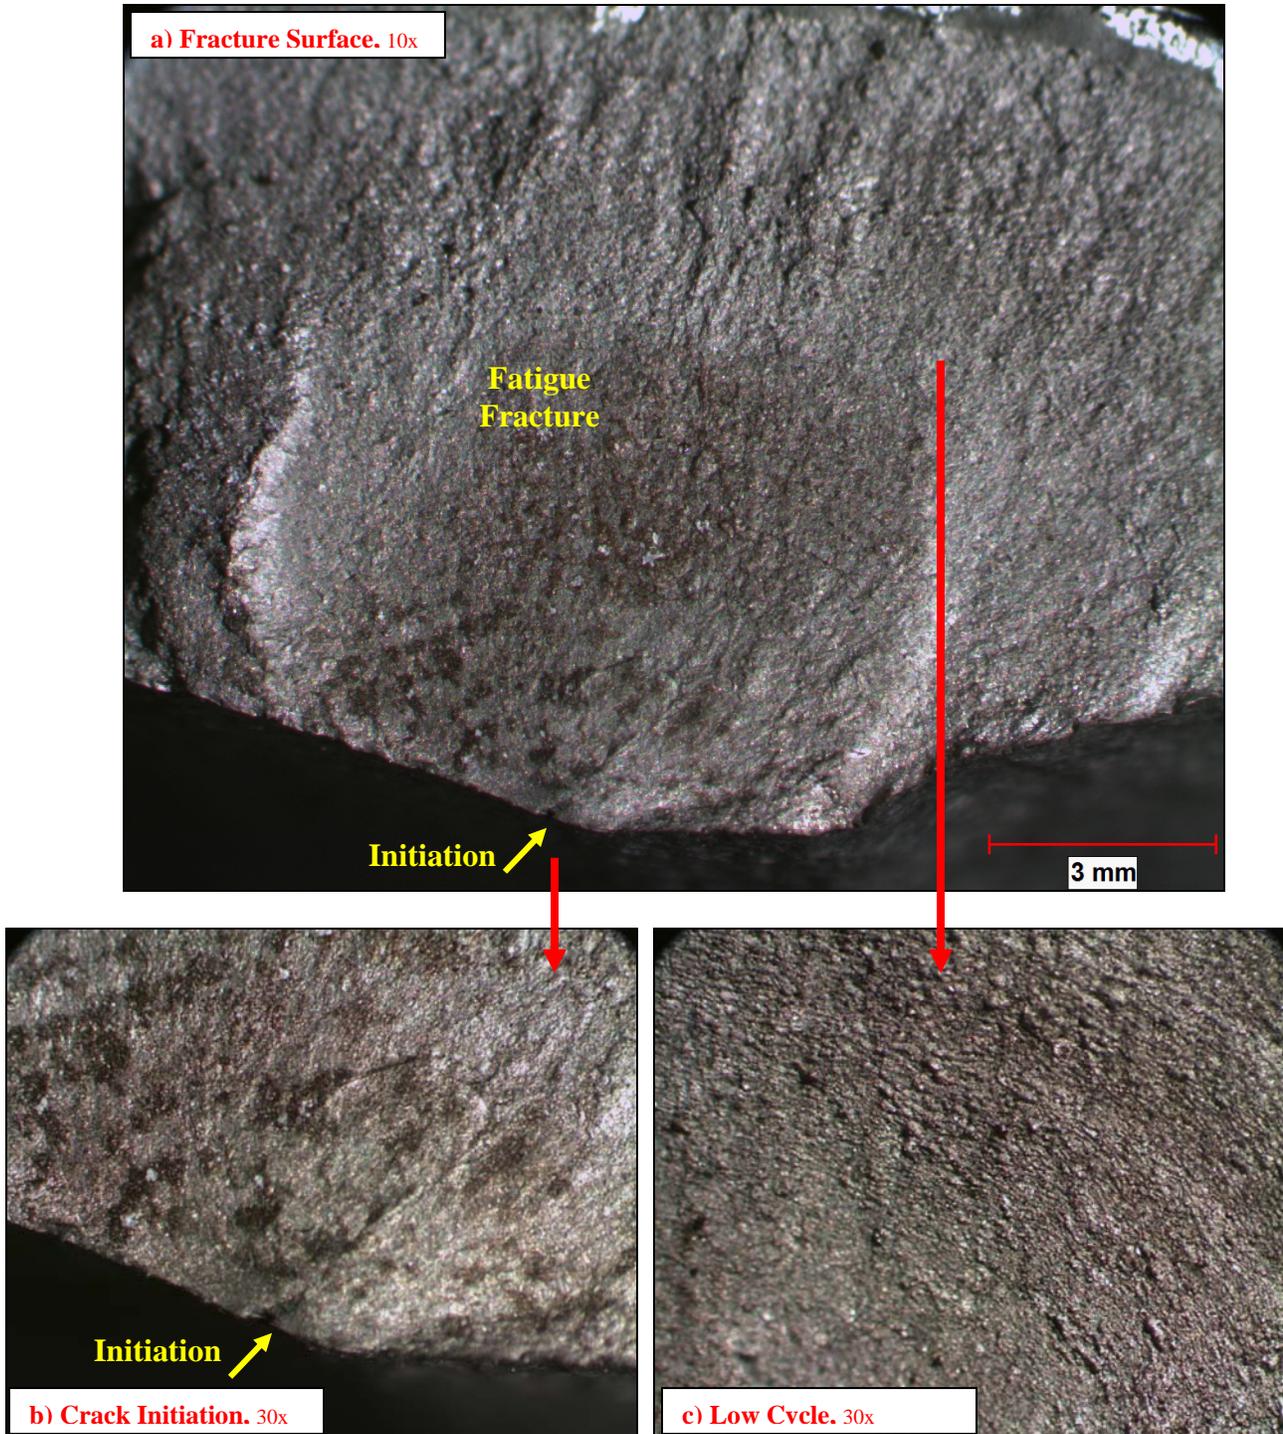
Macrographs displaying the fracture surface. The fracture features were consistent with fatigue failure from repetitive loading. Crack initiation had begun at a forging flaw yet further analysis would find that this small feature had not been a significant contributor to failure.
